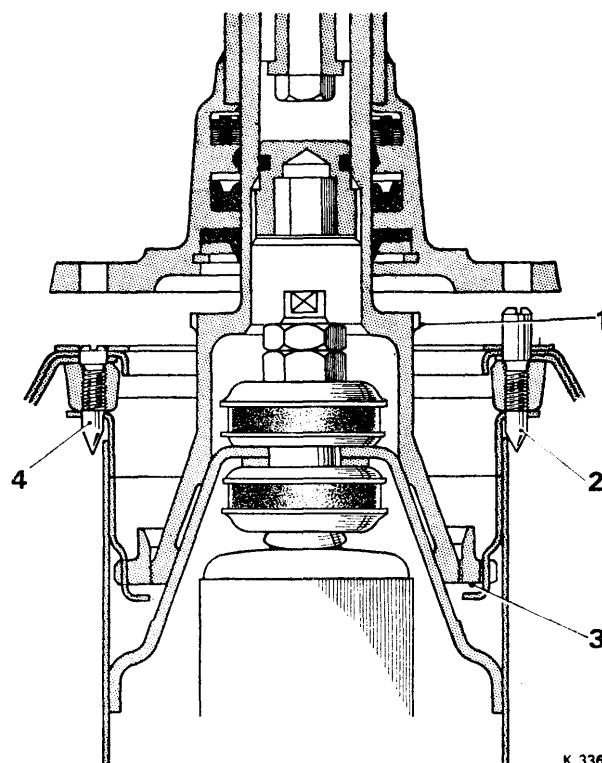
SECTIONAL VIEW—EARLY LOCKING ARRANGEMENT—REAR RAM PISTON TO ROAD SPRING ISOLATOR
